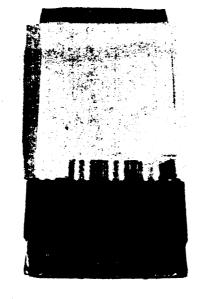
Clip Package Defect No. 3—Rusty, Excessively Oiled or Otherwise Defective Clips.
